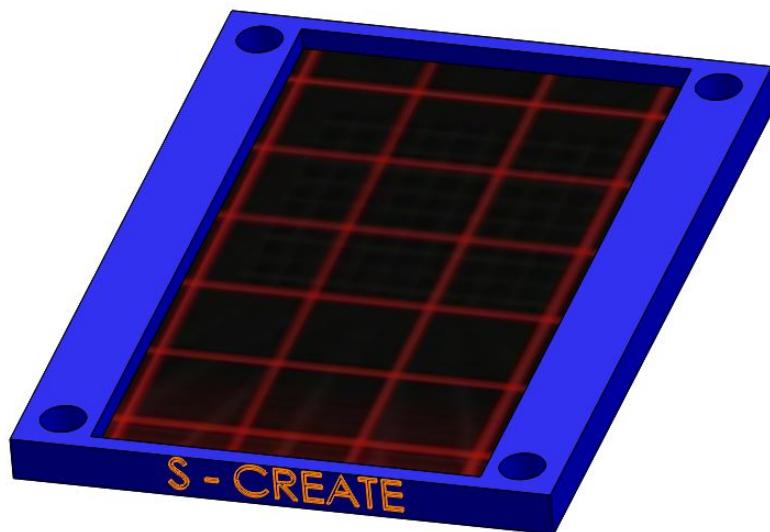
Ferrarer, Auston: Printing Plate
